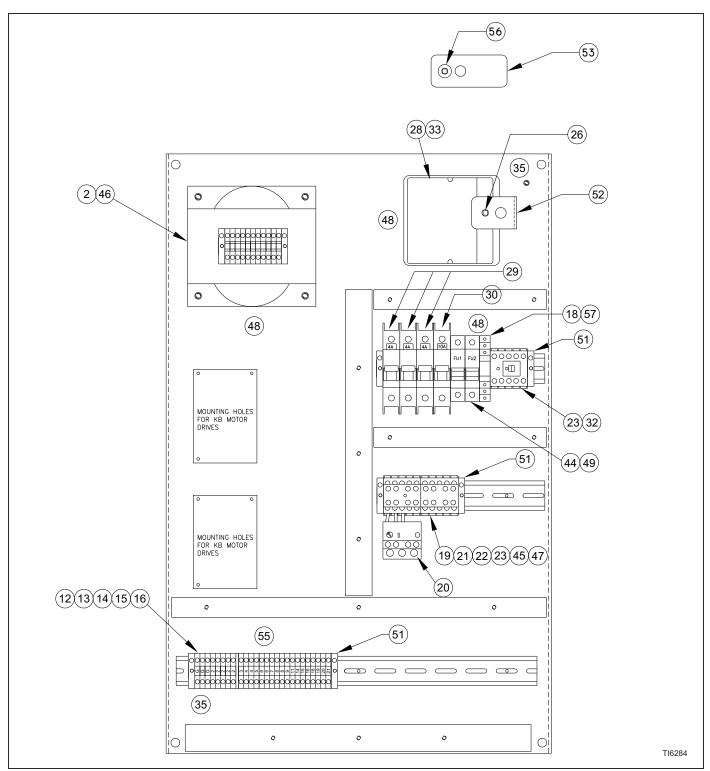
NFPA Electrical Case: Interior View with Electrical Components
